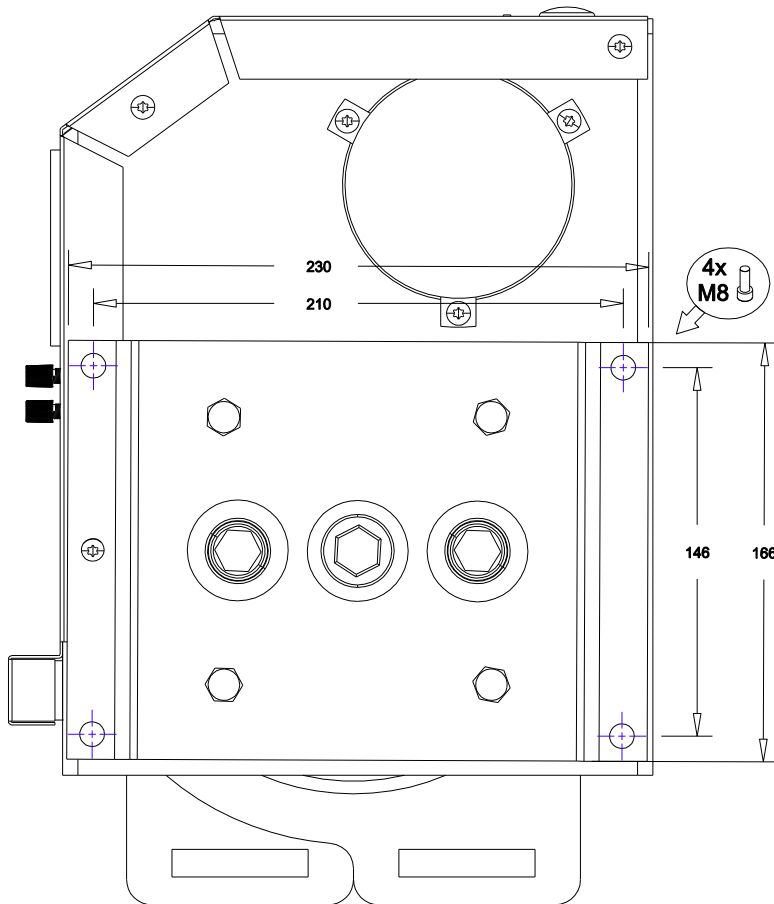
Mounting dimensions from bottom side. All dimensions in millimeters.
